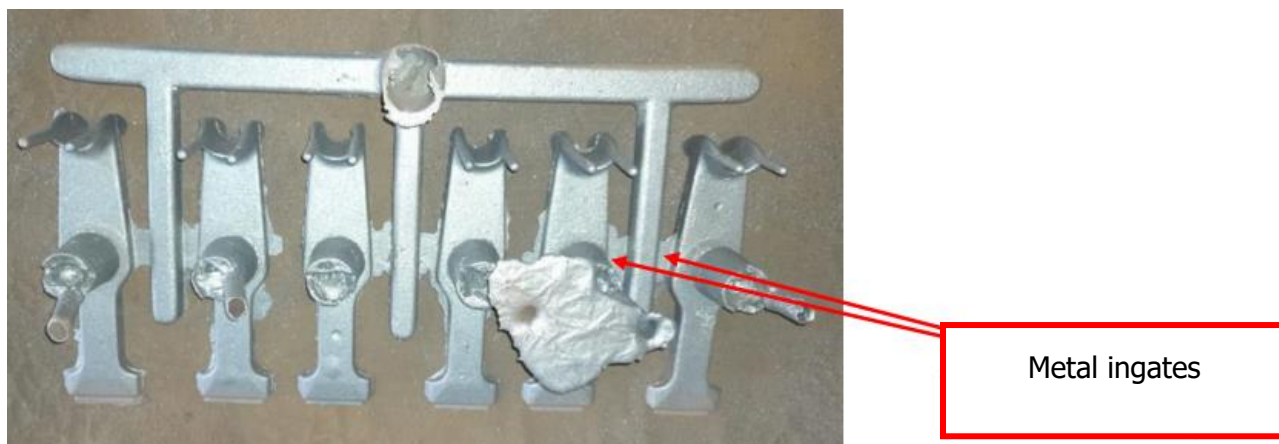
Illustrates a bottom view of the Centre piece castings showing relevant sections to be cut off. (NB: Removal of flesh is necessary)
